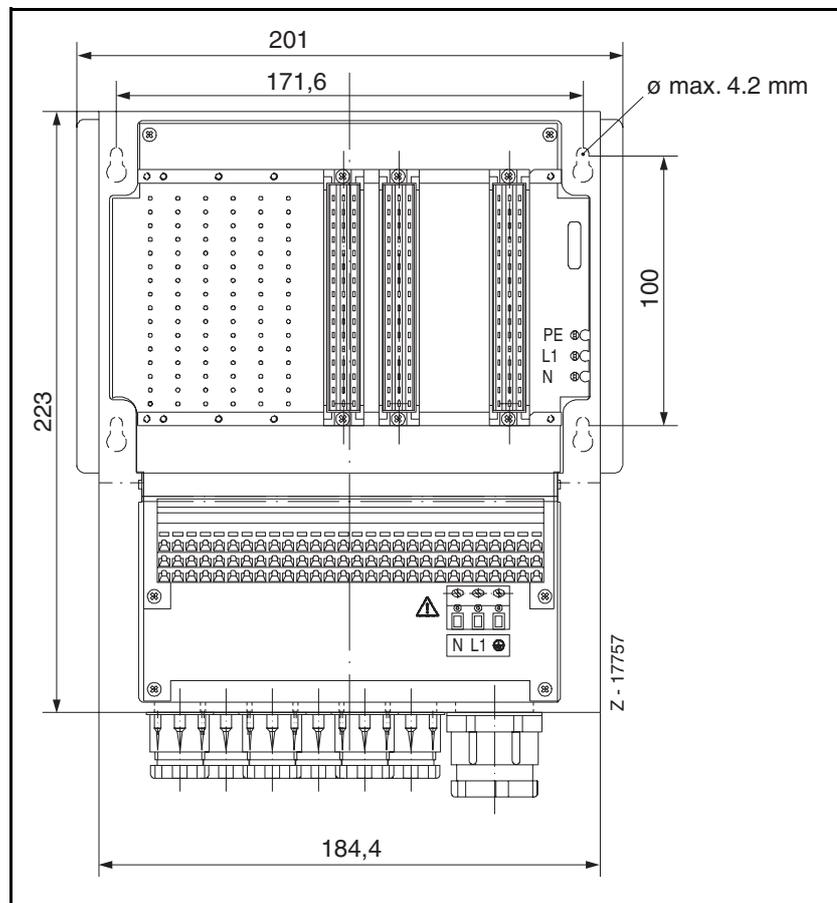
Dimensional drawing of field case (dim. in mm)
